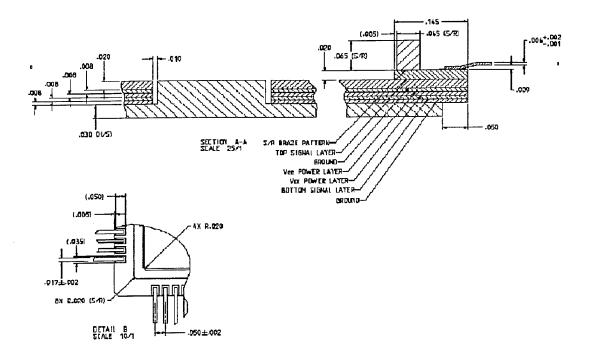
HSAD9 MCM Mechanical Dimensions.
